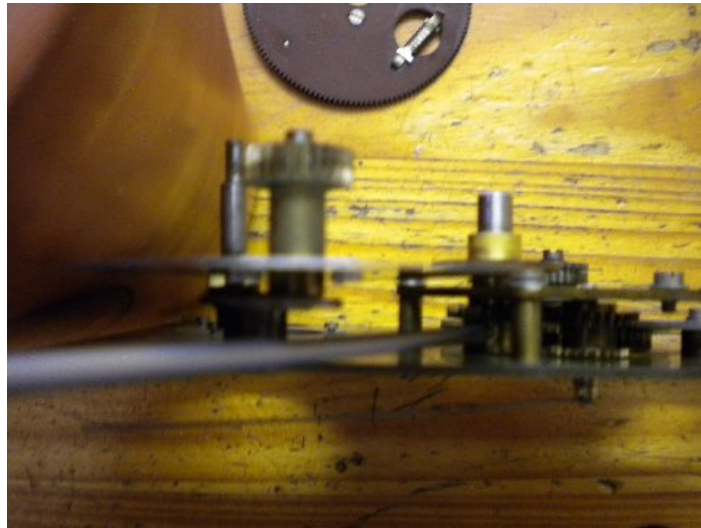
Screwdriver unscrewing the dial pointer to final Paxolin drive wheel for adjustment of the pointer.
